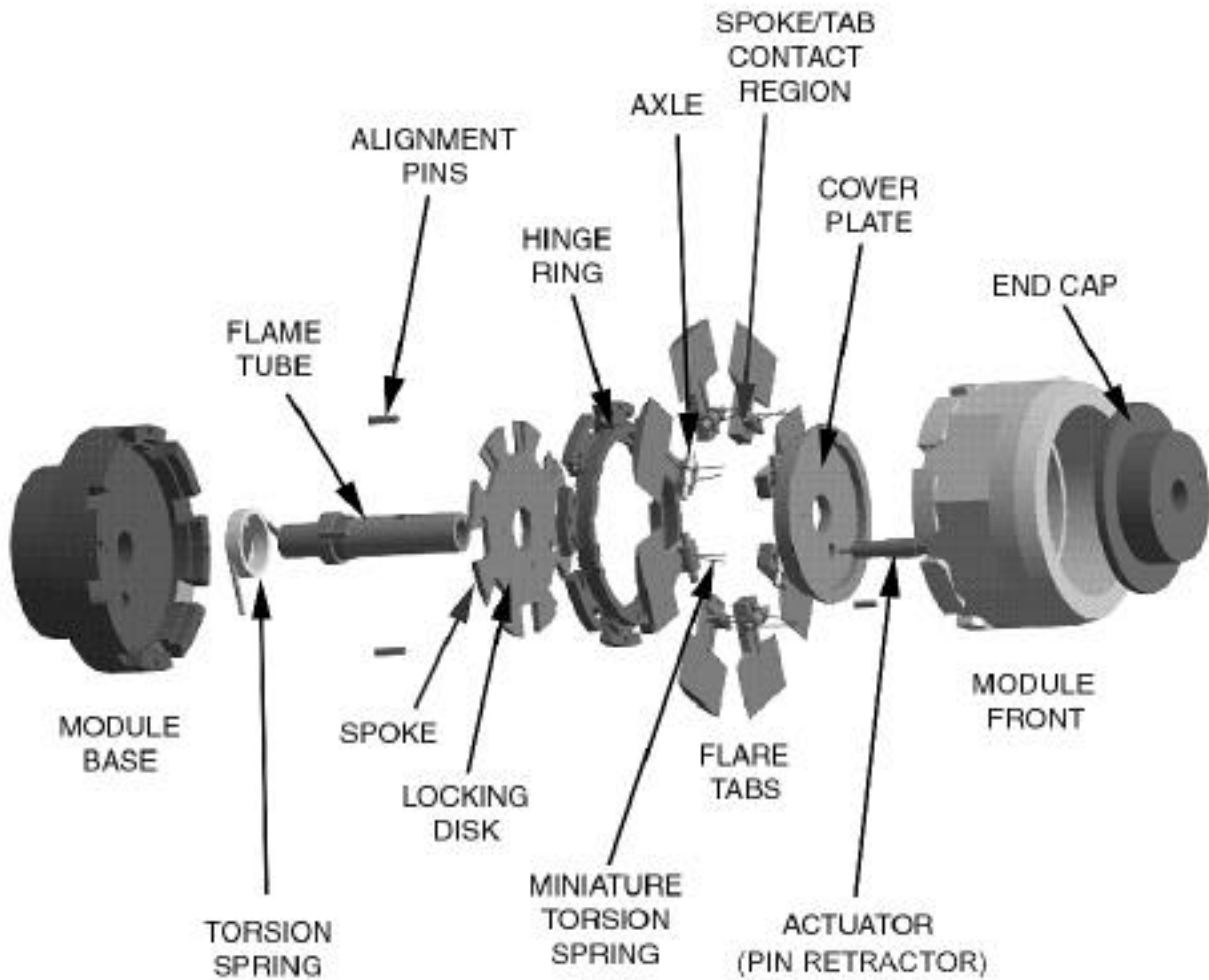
The Exploded Assembly View of the Prototype Range Correction Device for a Mortar.
